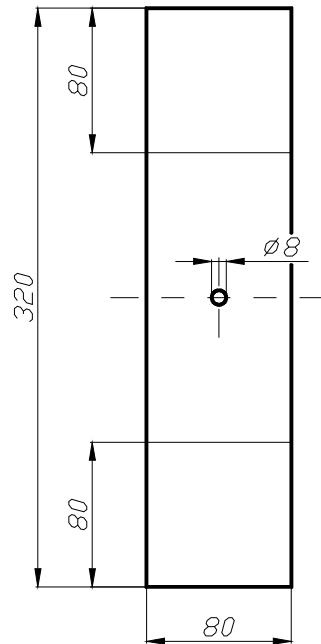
Geometry of the specimen used in comparative fatigue tests of aluminum alloy skin sheet; i.e., dimensions 320 mm x 80 mm, thickness 1.2mm. Each specimen has an initial hole of diameter 8 mm, which is then enlarged
